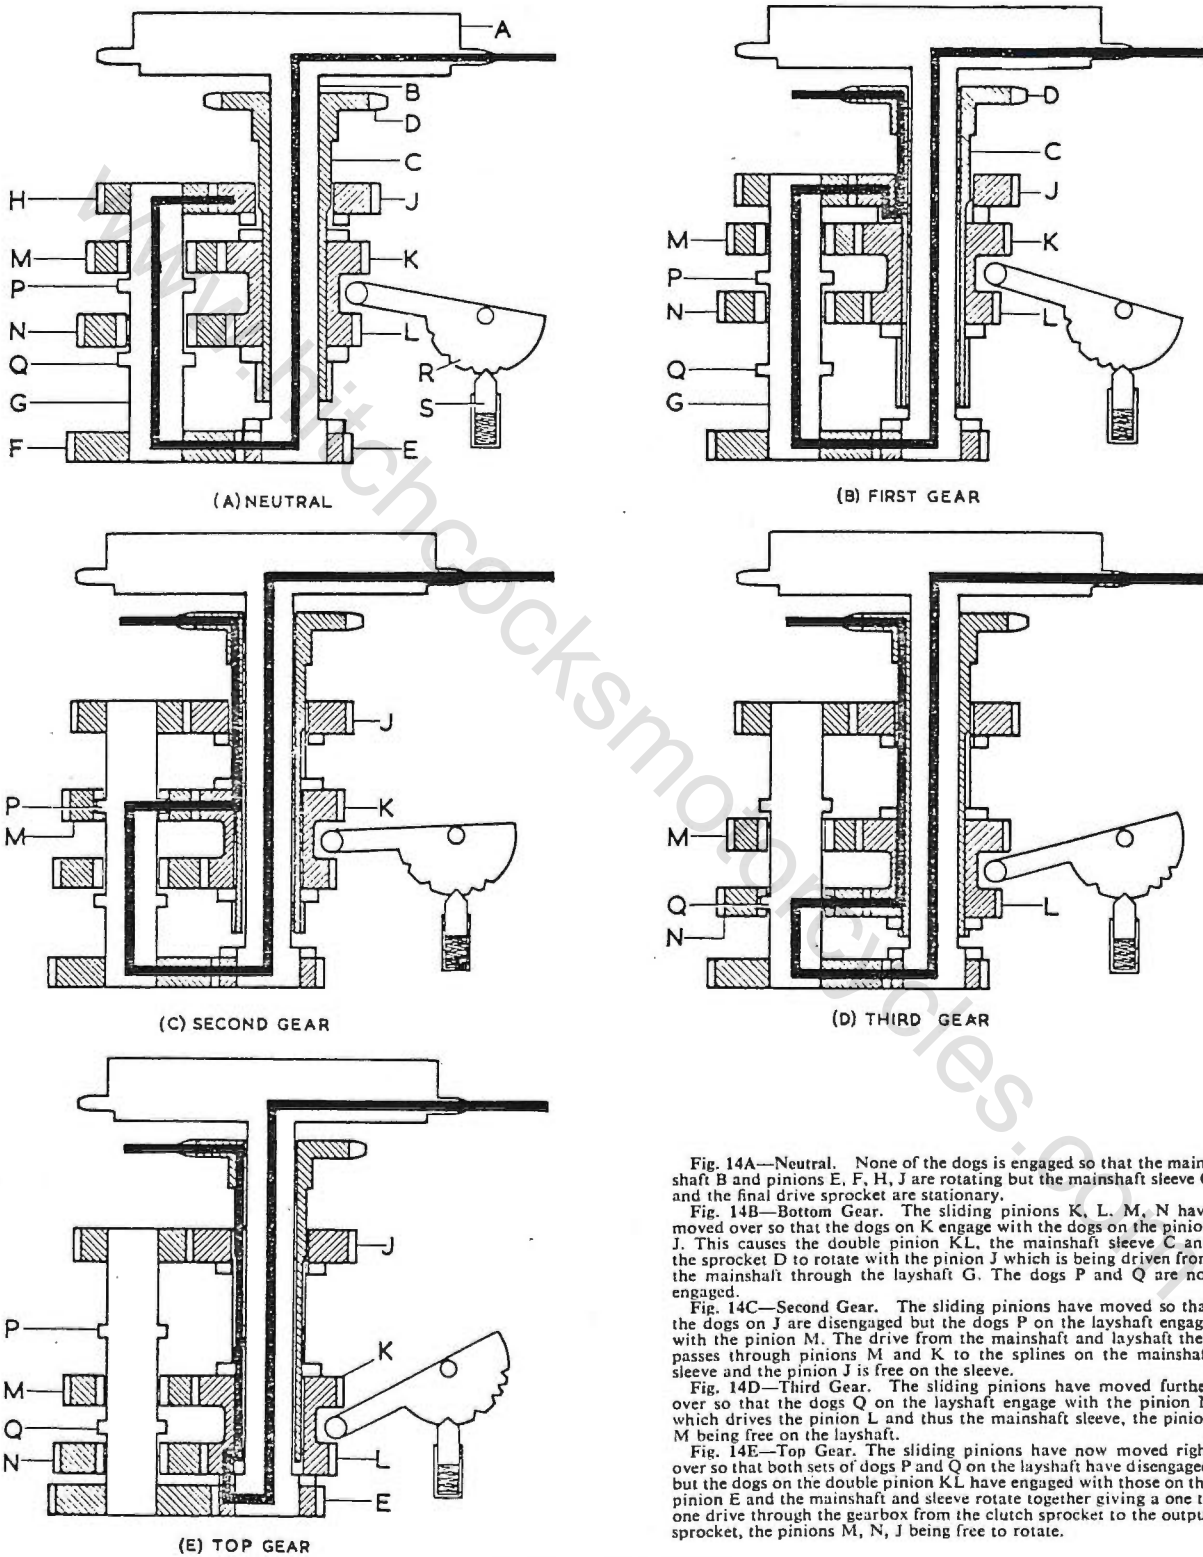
A—Neutral. None of the dogs is engaged so that the mainshaft B and pinions E, F, H, J are rotating but the mainshaft sleeve C and the final drive sprocket are stationary.
